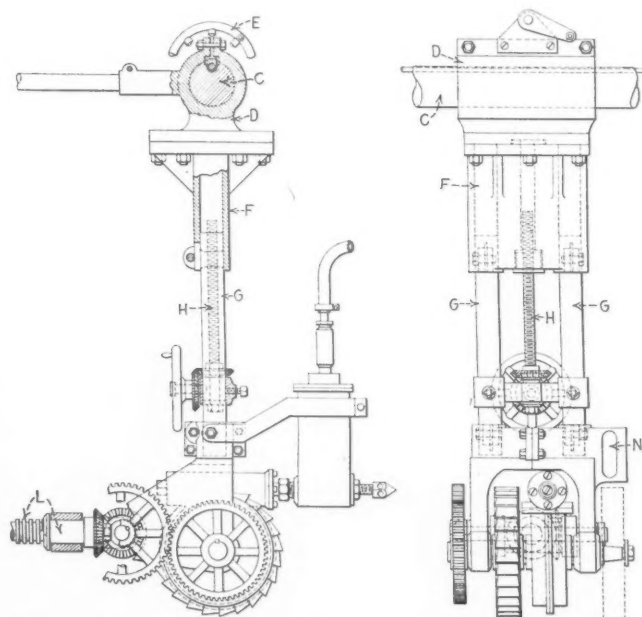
Miller head and radius arm for the cylinder saddle radial miller
